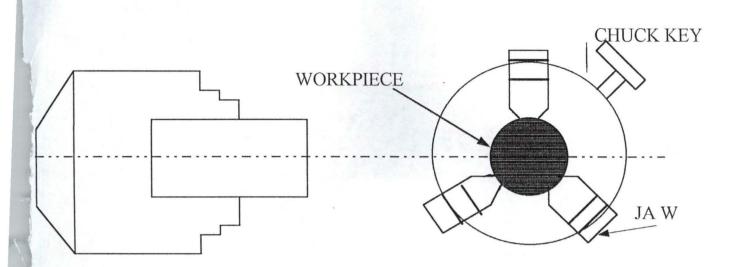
3 - JAW CHUCK OR SELF CENTERING CHUCK
